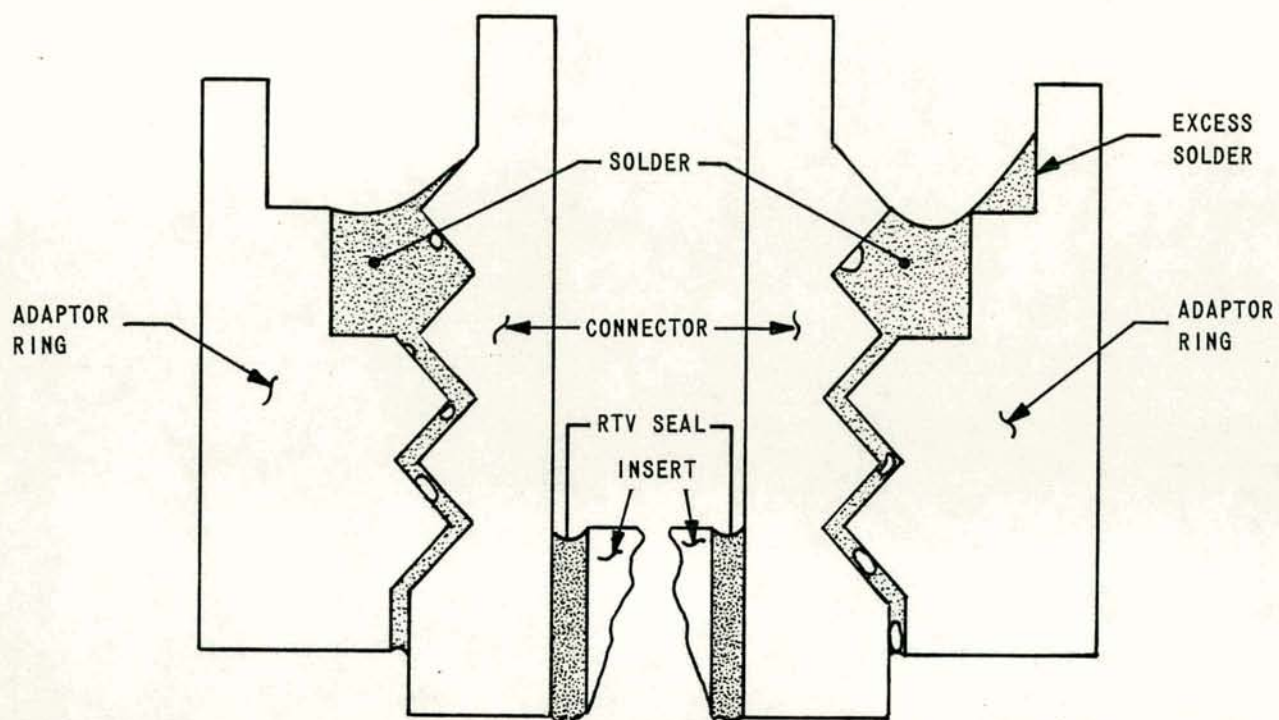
Acceptable (Left) and Unacceptable Solder Joints
